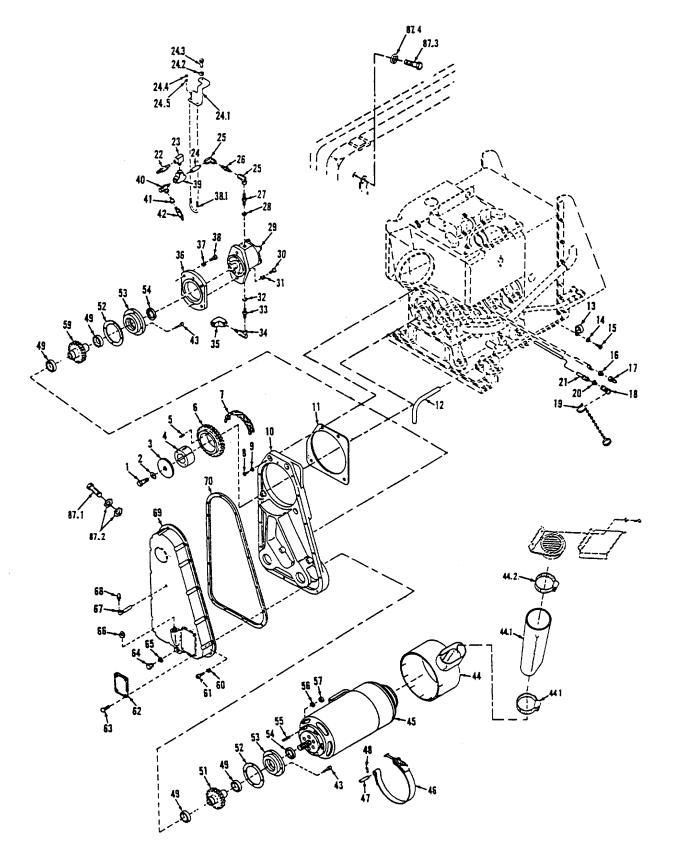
Auxiliary power unit-exploded view (Sheet 1 of 3).
